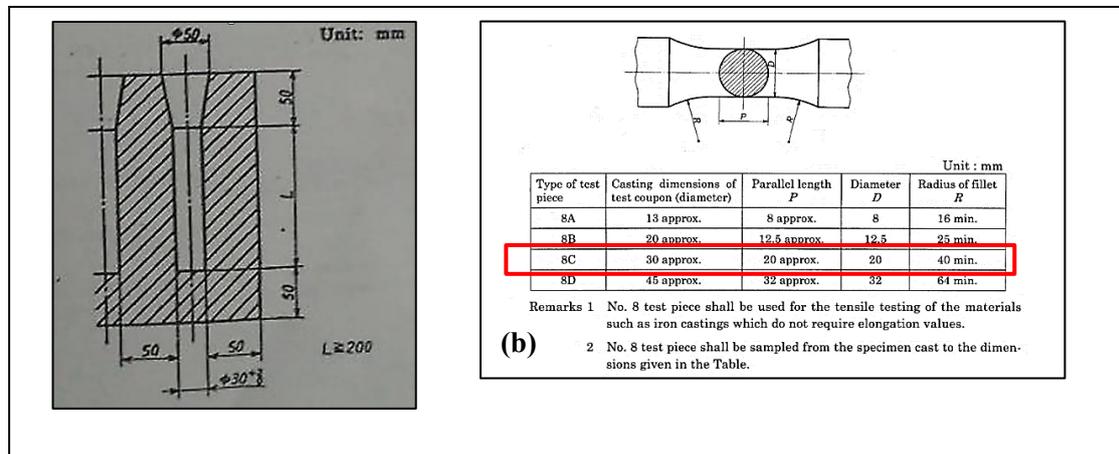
(a) The shape and size of the mould according to JIS G 5501 standard, (b) tensile test sample form refers to JIS standard Z 220.
